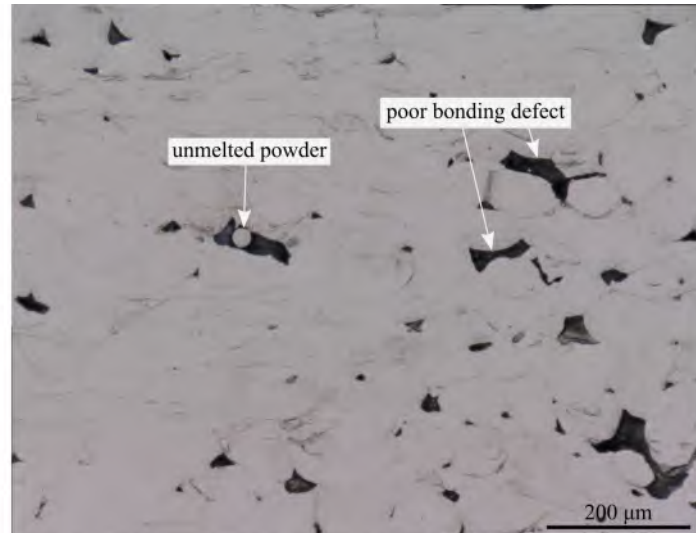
Optical image of the lack of fusion defects in LBAM printing part with stainless steel 316L.
